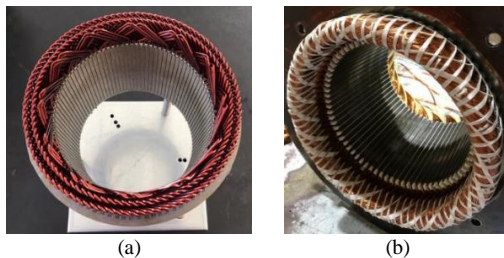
Stator windings of prototype machines. (a) 96-slot, hairpin winding; (b) 72-slot, random winding
